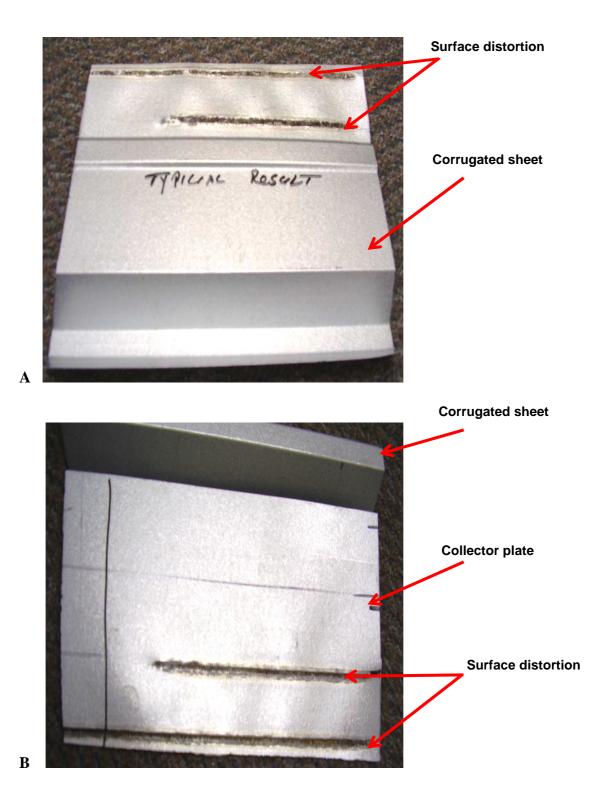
(A) Underside view and (B) Top view of surface distortion from resistance seam welding of Zincalume corrugated sheet and collector plate.
